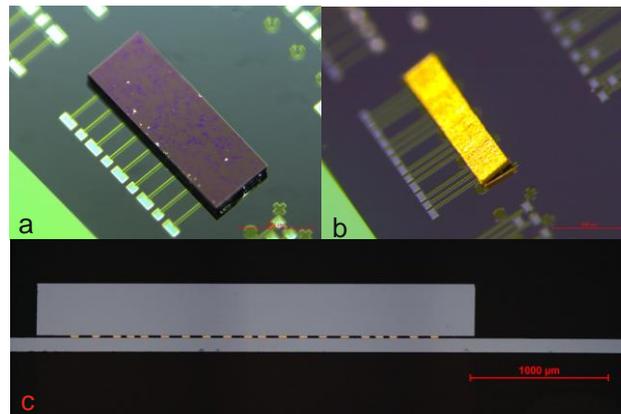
a) Stereo microscope picture of PD bonded to silicon interposer b) Stereo microscope picture of VCSEL bonded to silicon interposer c) Cross-section of drivers bonded to silicon interposer
